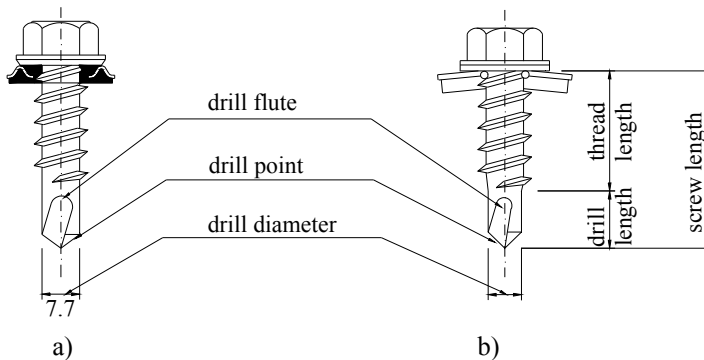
Self-drilling screws: a) drill diameter equal to body diameter for thin-to-thick connections; b) drill diameter smaller than body diameter for thin-to-thin connections
